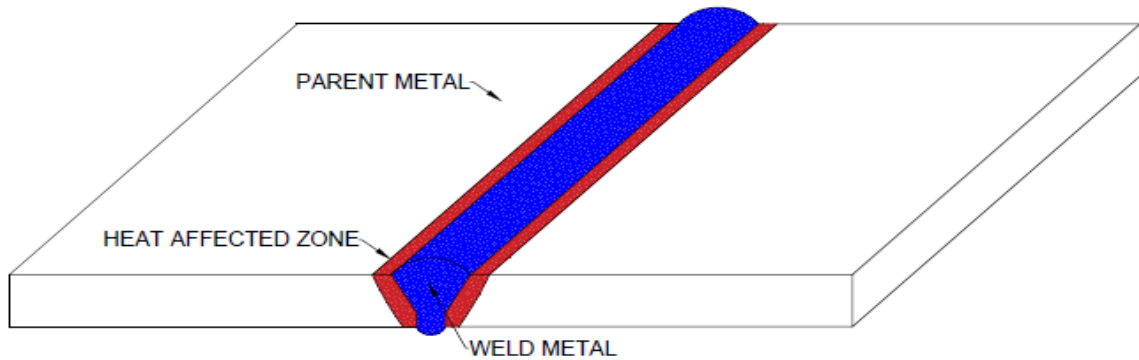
Butt joint showing of weld metal zone, heat affected zone and base metal
